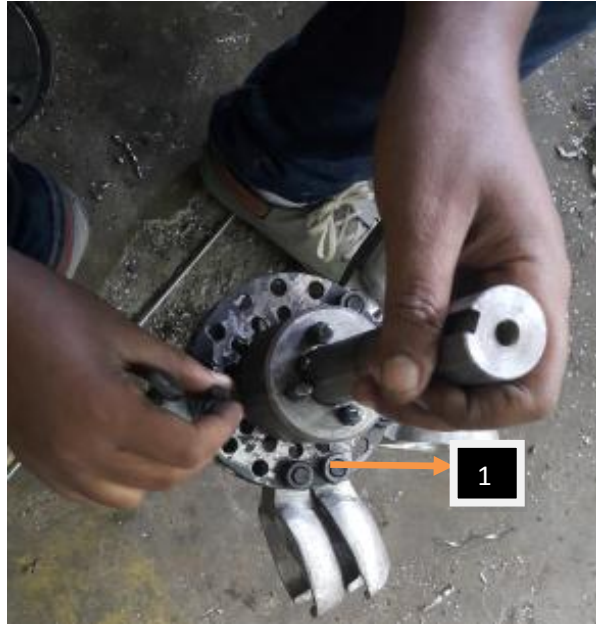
Photography of fixing of runner plates with M10 Bolts
